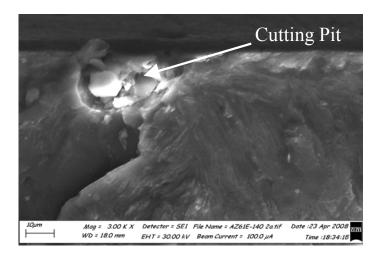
Surface fracture of specimen machined by EDM as-cut ( $\sigma_{max}$ =140 Mpa)
